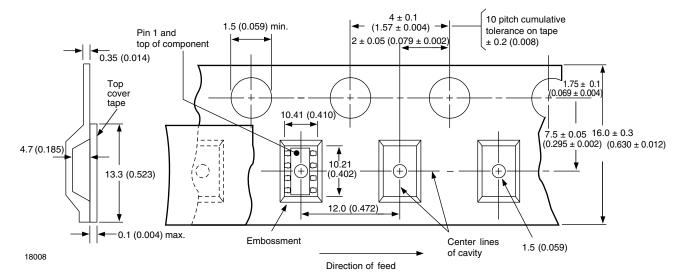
Tape and Reel Packing (1000 pieces on Reel)
